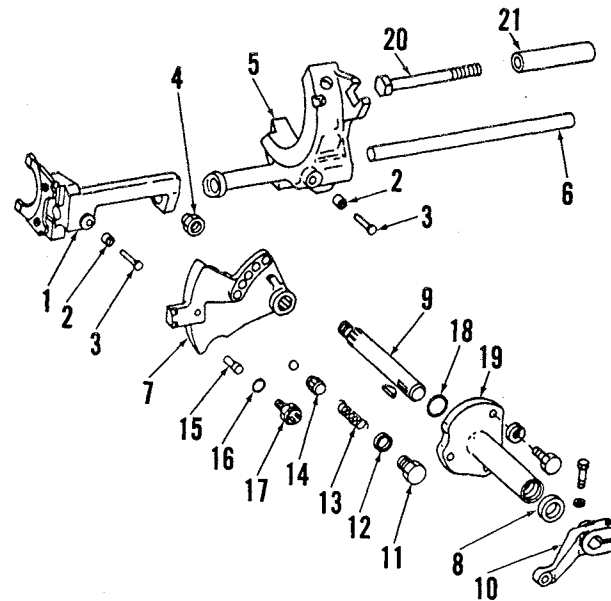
Exploded view of range shifter components used on Models 4050, 4250 and 4450 equipped with Quad-Range transmission. Refer to Fig. 122A for similar parts for 4650 tractors.
